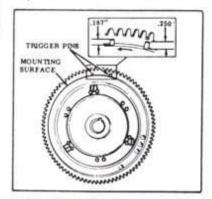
Remove flywheel and drive trigger pins in or out as necessary until long pin is extended 0.250 inch (6.35 mm) and short pin is extended 0.187 inch (4.75 mm) above mounting surface.
